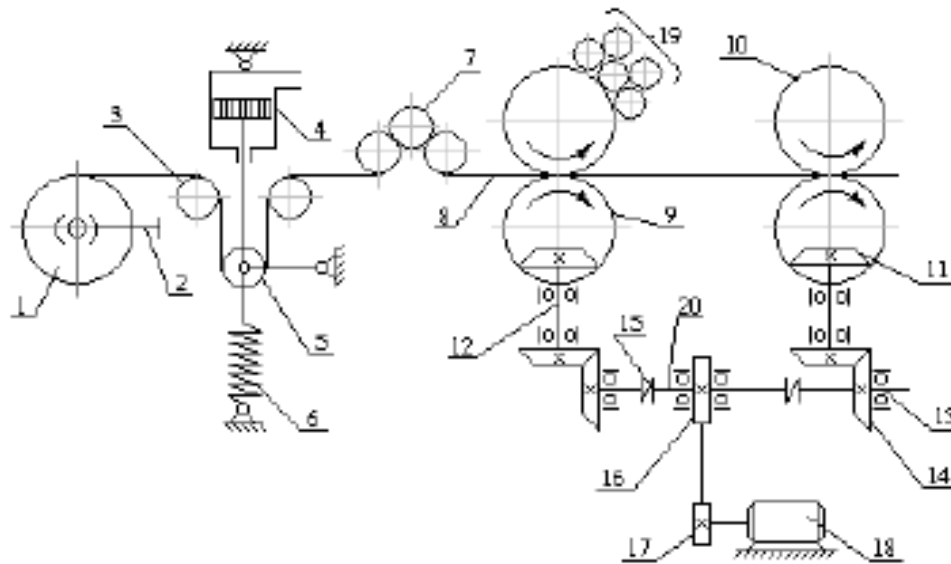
Diagram of a two-color roll machine sectional construction: 1 - roll, 2 - roll braking system, 3 - tape guide roller, 4 - pneumatic cylinder, 5 - oscillating roller, 6 - tension spring, 7 - system of stabilizing rollers, 8 - paper tape, 9 – first printing machine, 10 - second printing machine, 11 - bevel gear, 12 - vertical shaft, 13 - horizontal table support, 14 - conical pair, 15 – elastic clutch, 16 - driven pulley, 17 - drive pulley, 18 - electric motor, 19 – colorful apparatus, 20 - horizontal synchronizing shaft [5]
